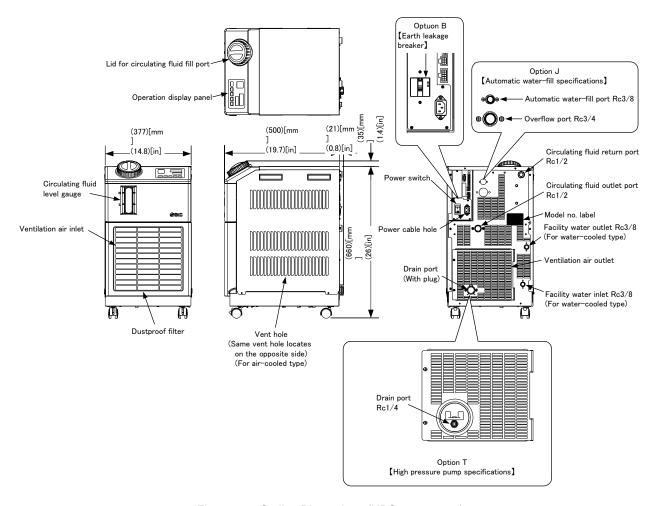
Outline Dimensions (HRS030-\*\*-20-\*)
